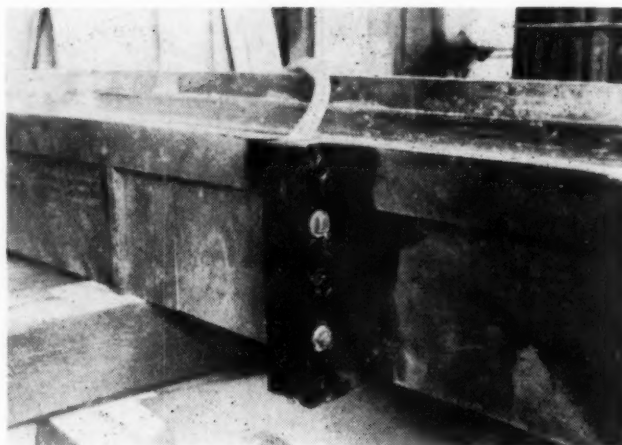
FLANGE CONSTRUCTION FOR BOLTING TOGETHER SECTIONS OF A LONG, SHALLOW, PICKLING TANK
